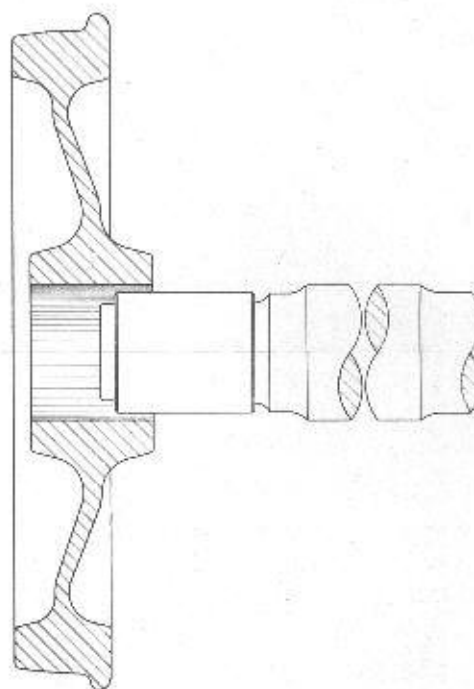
D. Wheel completely removed. The bearing inner race remains on the journal.
